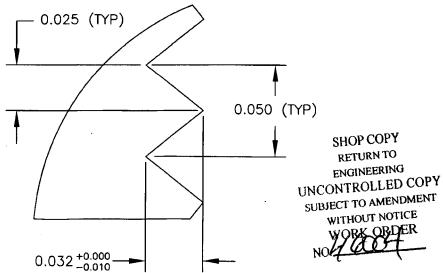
DETAIL B: RIDGE DETAIL PARTIAL SECTION SCALE 1:20
